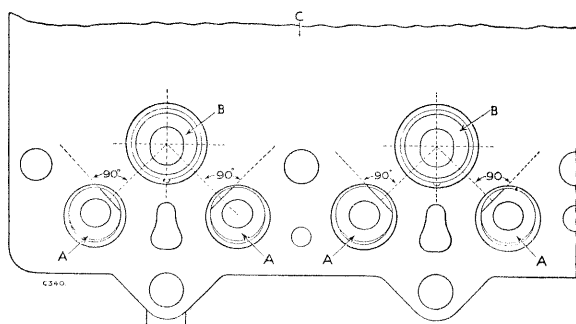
Correct position of push-rod tubes in relation to hot plugs
